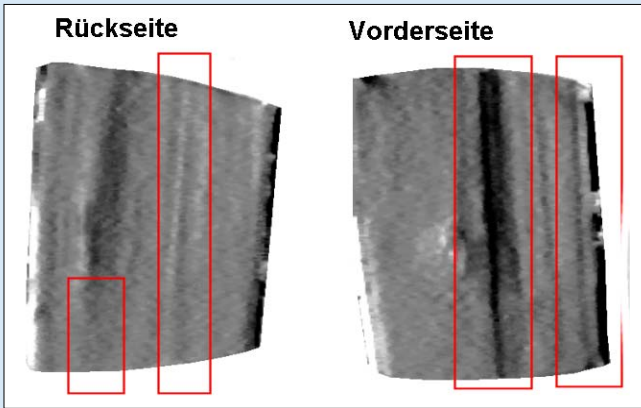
Analysis image of the test piece with internal damage (left: rear, right: front)
